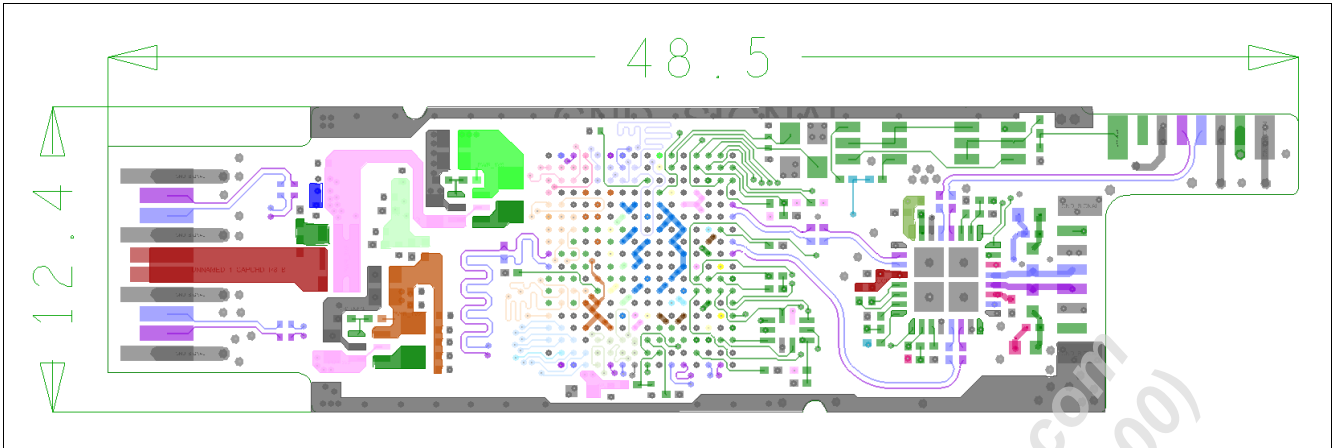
EASY PRX126 REF BOARD Dimension Drawing
